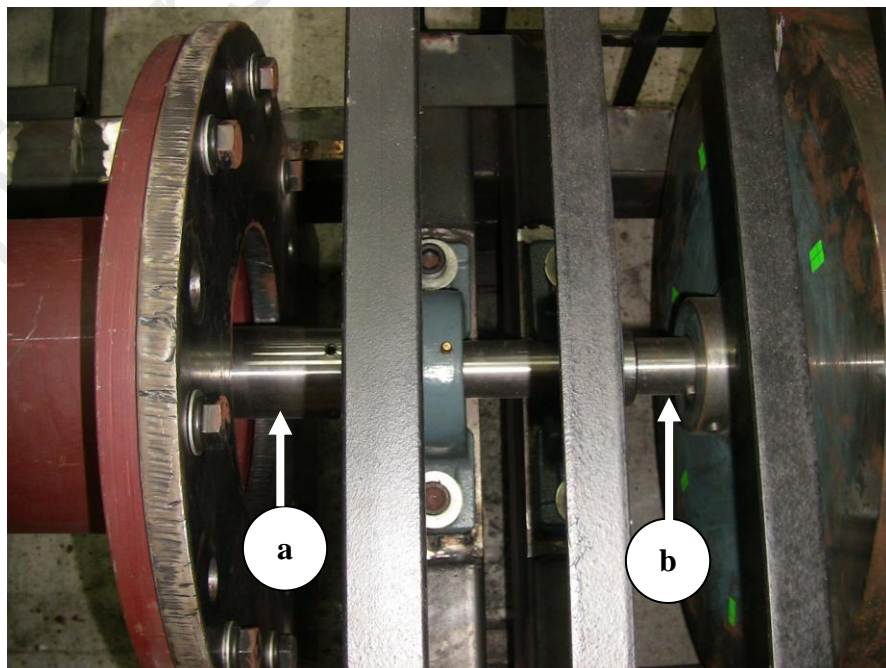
(a) Custom made pump-shaft coupling and (b) shaft.
